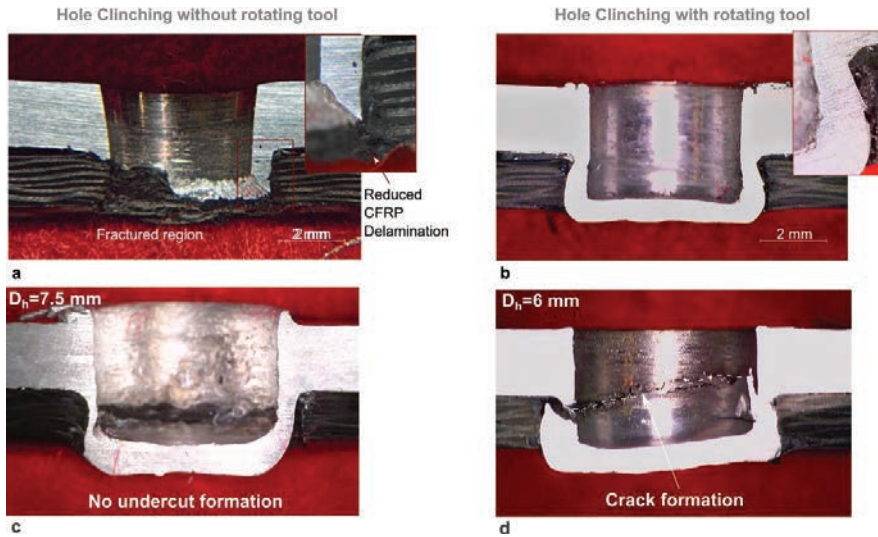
Comparison of cross section of clinched joints achieved by hole-clinching with (a) common machine and with rotating tool under (b) optimized conditions (c) large hole and (d) small hole.
